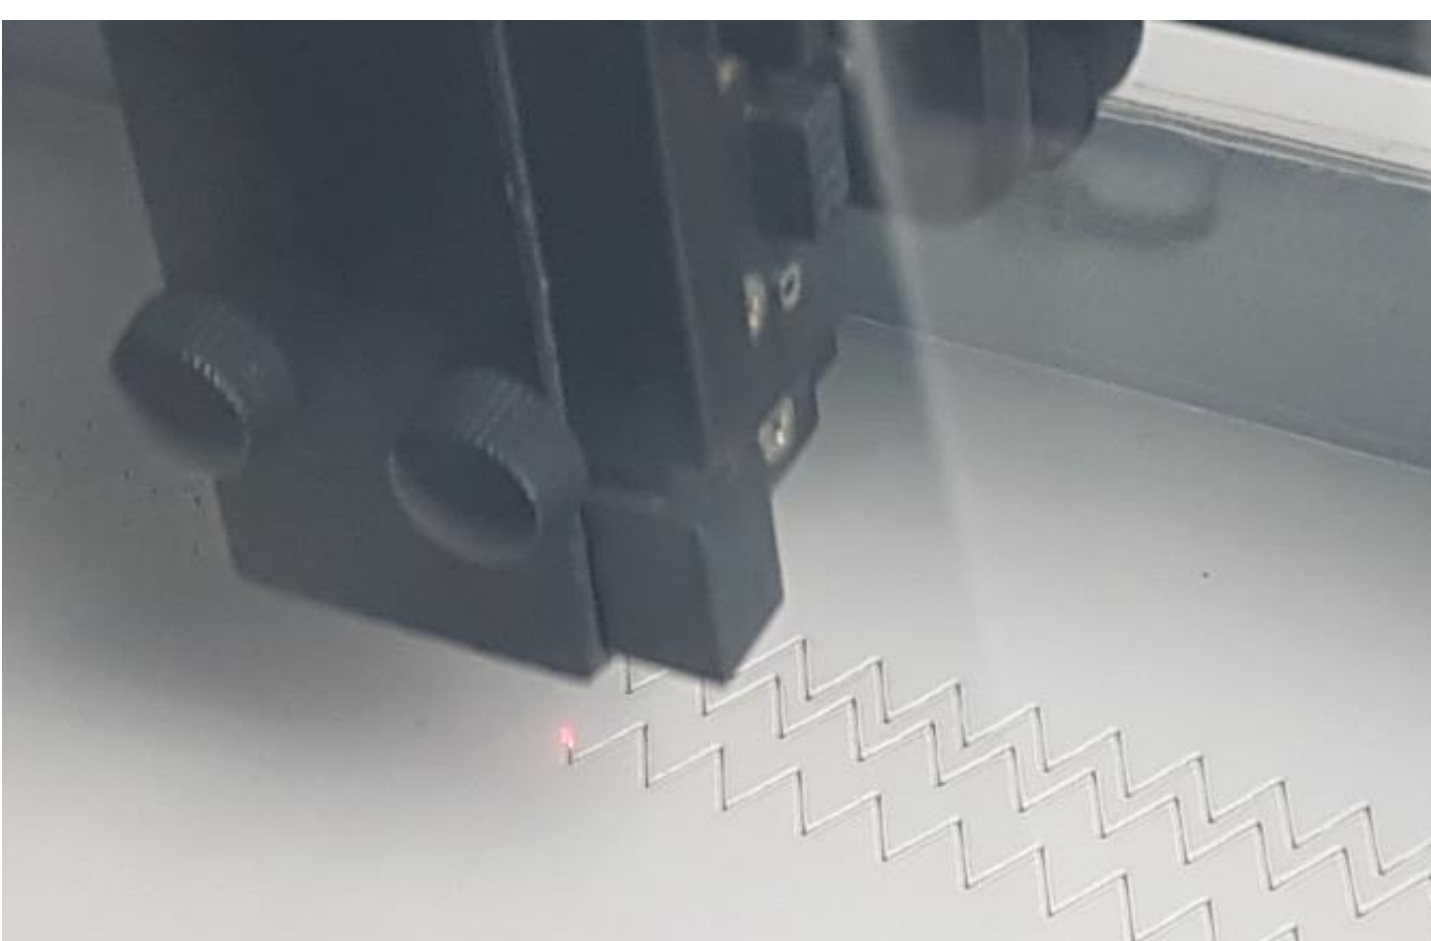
Laser processing of a 3D-zigzag Turbulator.
